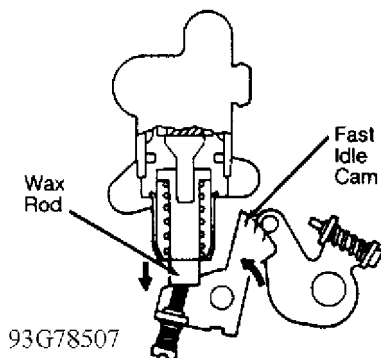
Checking Fast Idle Cam Separation (RX7)
